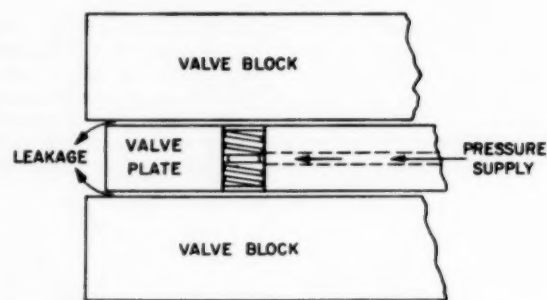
SELF-CENTERING DEVICE EMPLOYED IN PNEUMATIC ROTARY-PLATE VALVE
